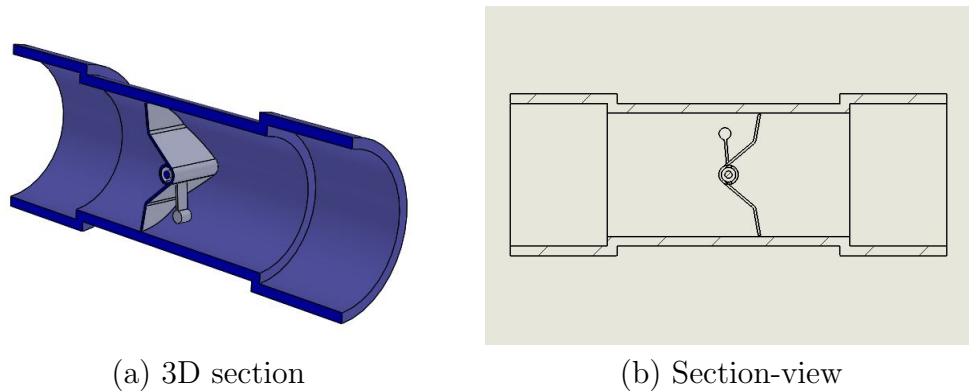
RDZ1 valve in a closed position (both angled-gates have counterweight, but only one is visible due to the section) (a) 3D section ; (b) Drawing section-view.
